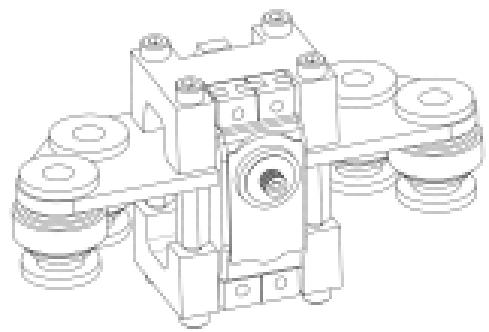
Bearing Shaft Middle Ring Assembly
